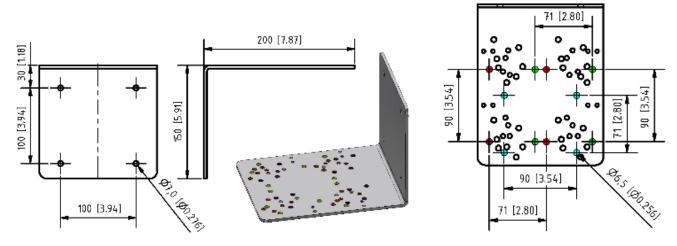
Mounting bracket hole pattern for wall-mount (left) and pump (right)
